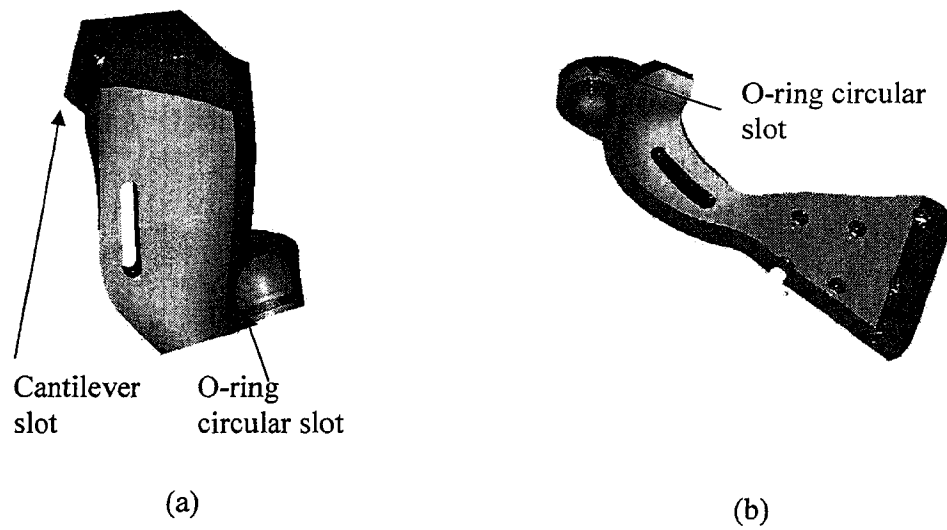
Sectional view of above right clubfoot AFO showing arrangement for fixing mechanical elements (a) upper part (b) lower part (See color section)
